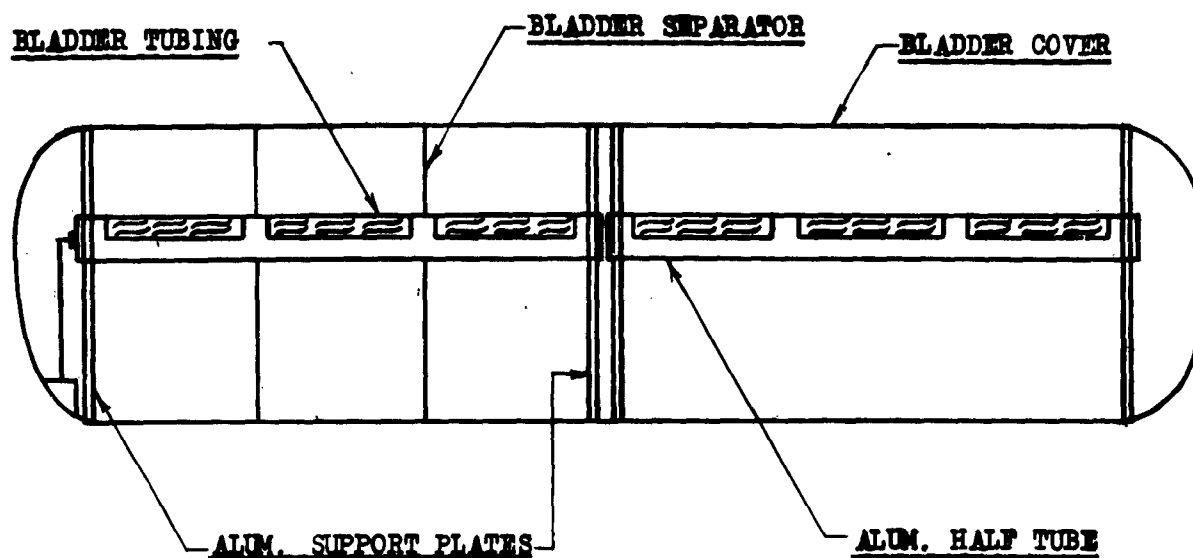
HORIZONTAL BLADDER TUBE TANK, DESIGN THREE
